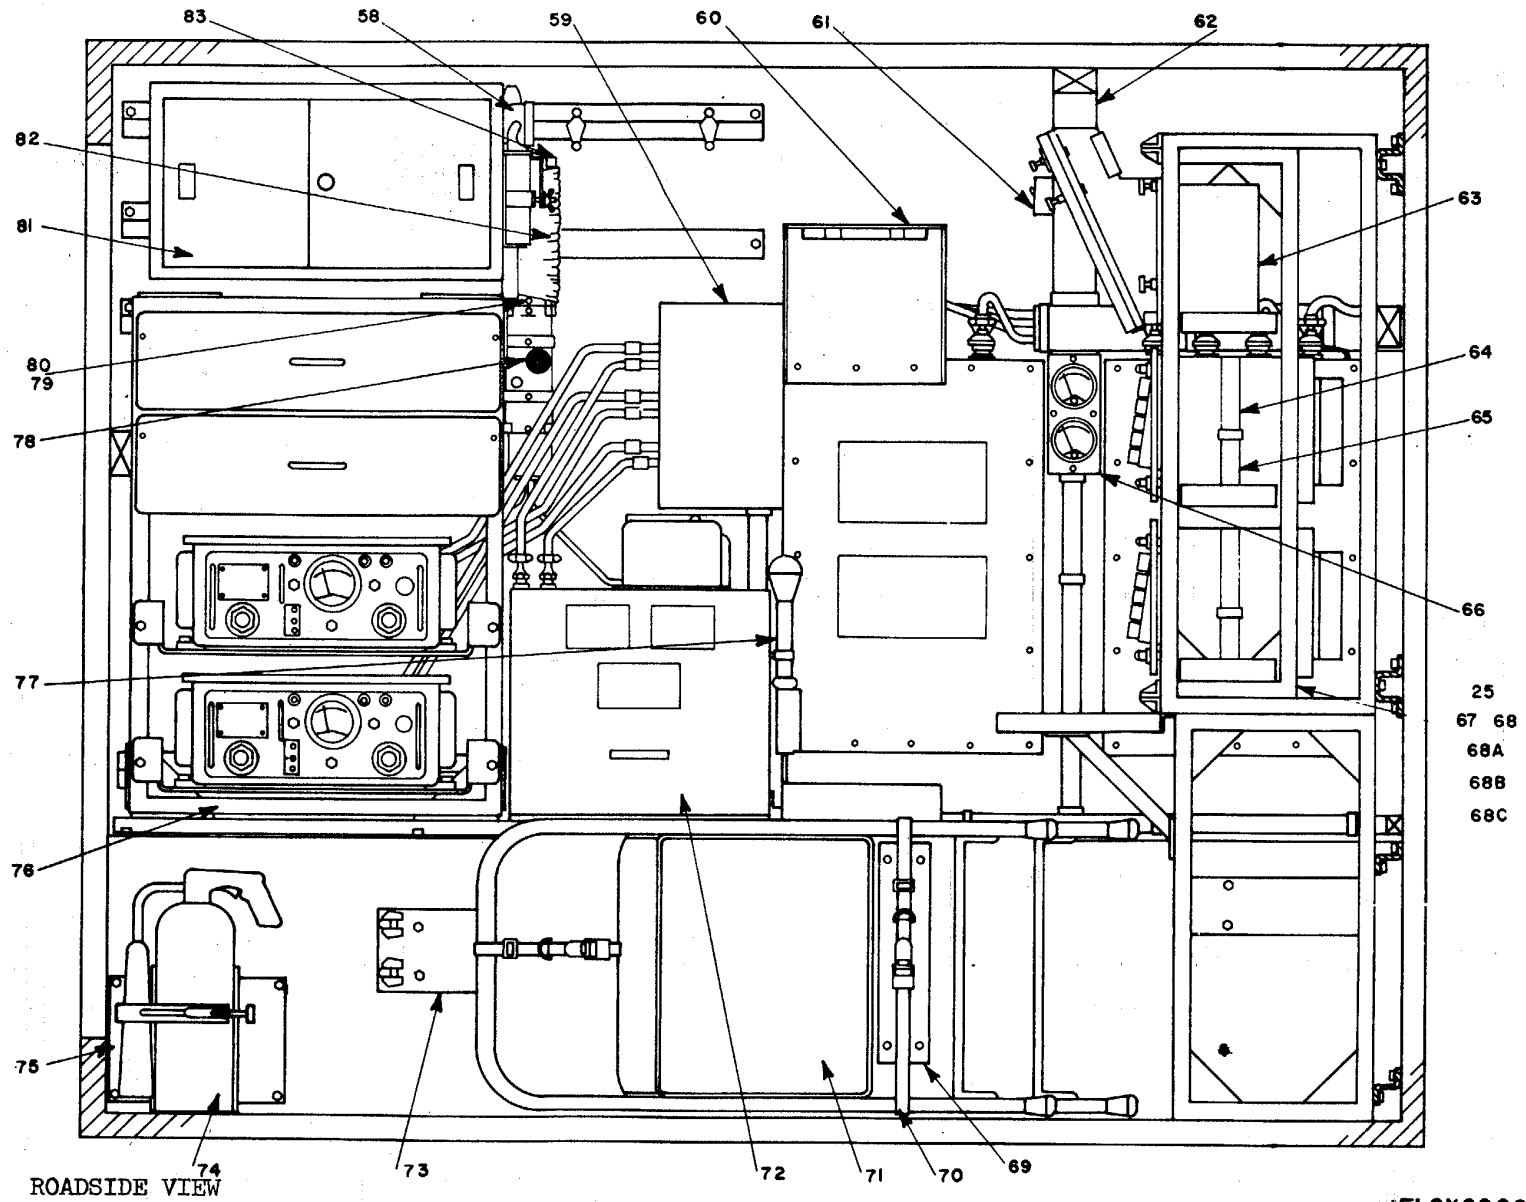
Shelter Electrical Equipment S-561/TTC-41(V) (Sheet 3 of 7)
